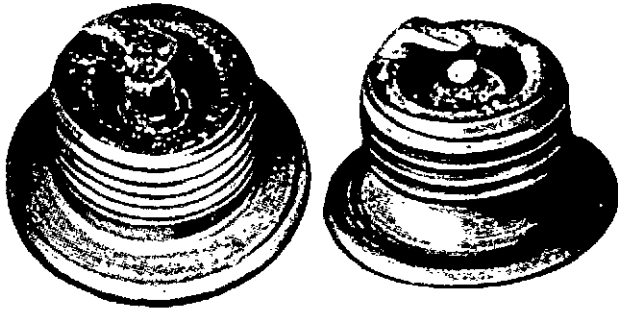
Faulty spark plugs. Left: cold plug used in an engine that should have a hot plug. Right: hot plug used in an engine that should have a cold plug.
